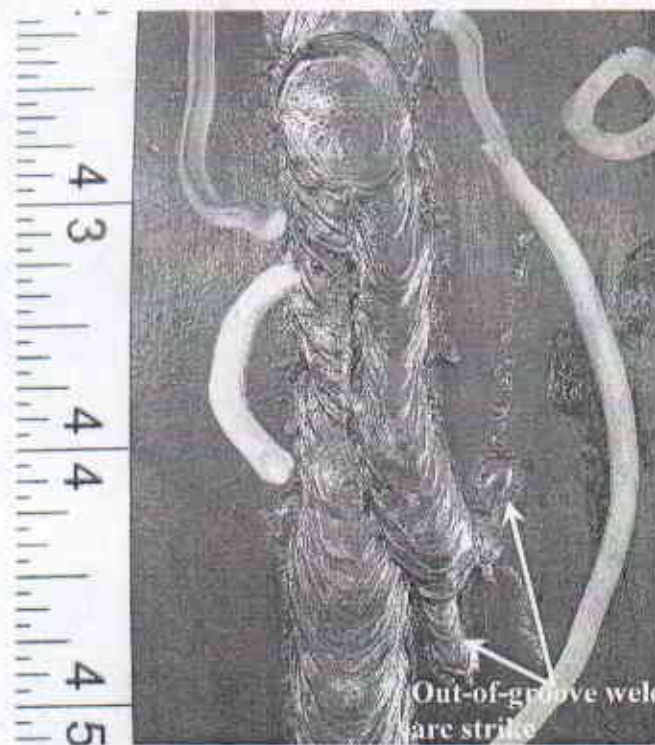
Photograph of root of girth weld in Sample 3. Arc strike and out-of-groove weld are clearly visible. Scale divisions are 1/16th inch.
